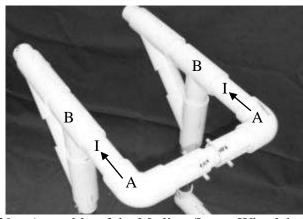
Assembly of the Medium/Large Wheelchair (Step 20).
